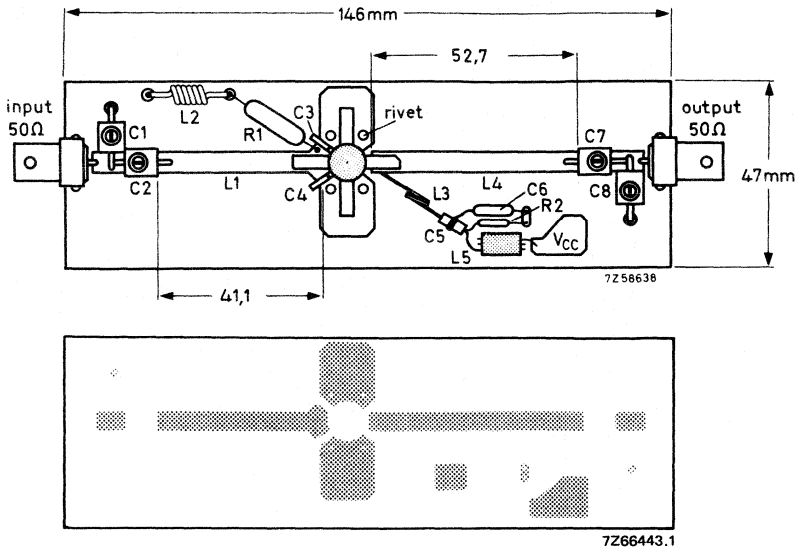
Component layout and printed-circuit board for 470 MHz test circuit.
